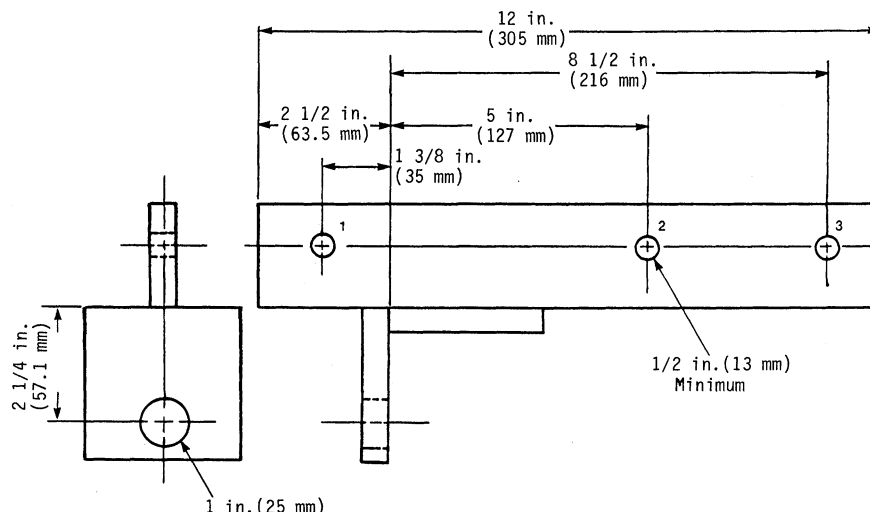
Lifting tool shown in Fig. 277 may be fabricated from 1/2 inch (13 mm) steel plate using dimensions shown in above drawing.
